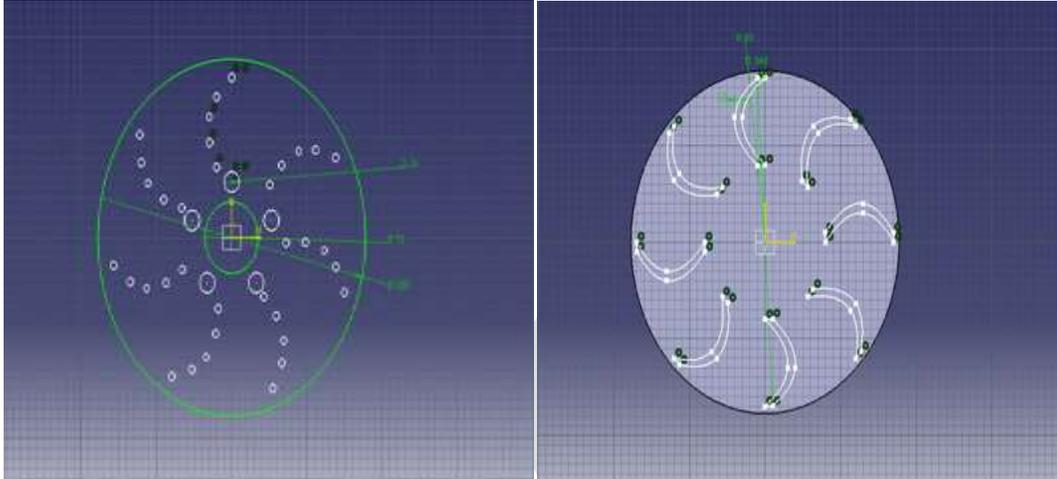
2-D View Of Disc Rotor(Composite And Solid Rotor) And 2-D View Of Disc Rotor (Vented Rotor)
